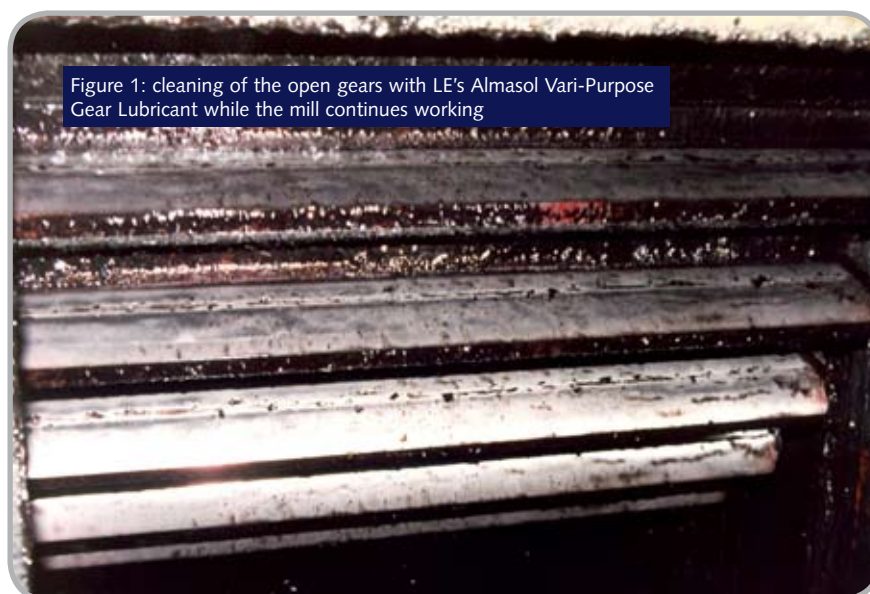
cleaning of the open gears with LE's Almasol Vari-Purpose Gear Lubricant while the mill continues working
